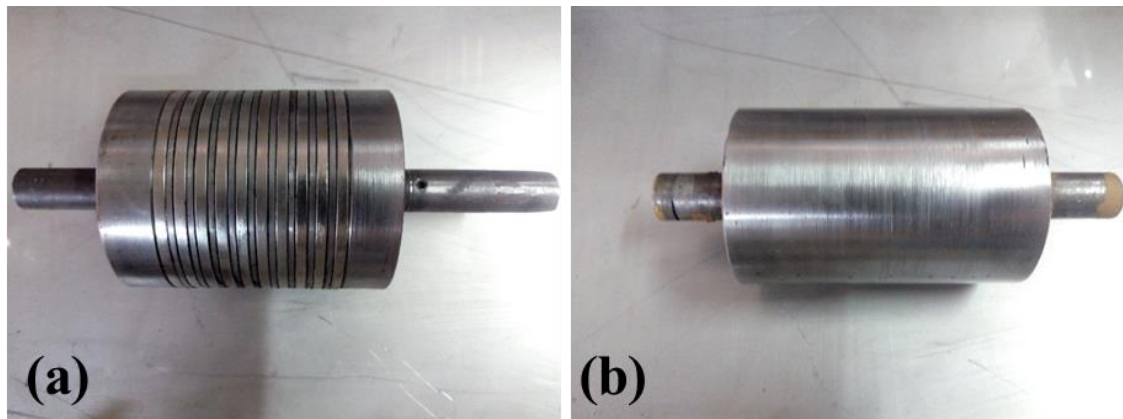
(a) Optimized magnetic roller (b) Support roller.
